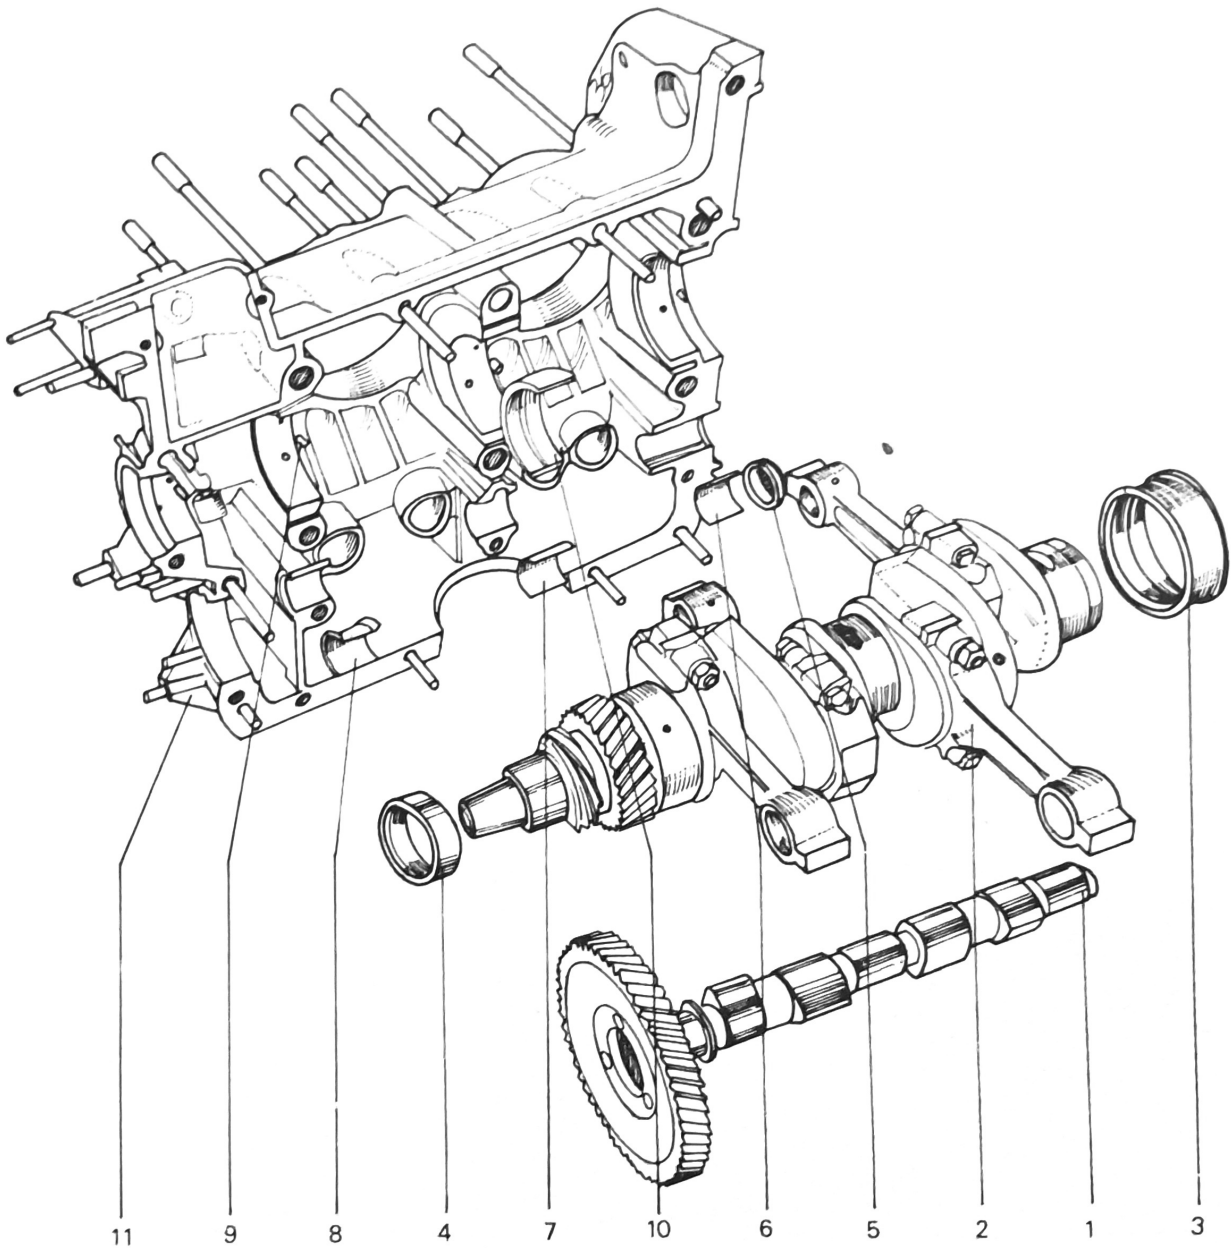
2 The crankshaft, camshaft and one crankcase casting
